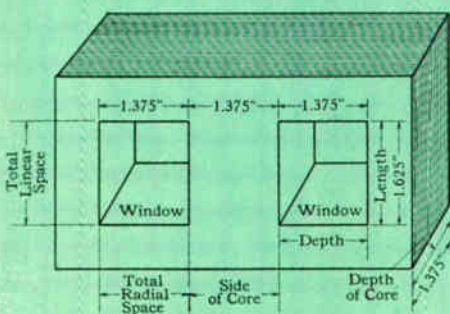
The dimensions important in designing a transformer coil are shown in this typical transformer core. Specific dimensions are developed in the problem at the end of the article.
